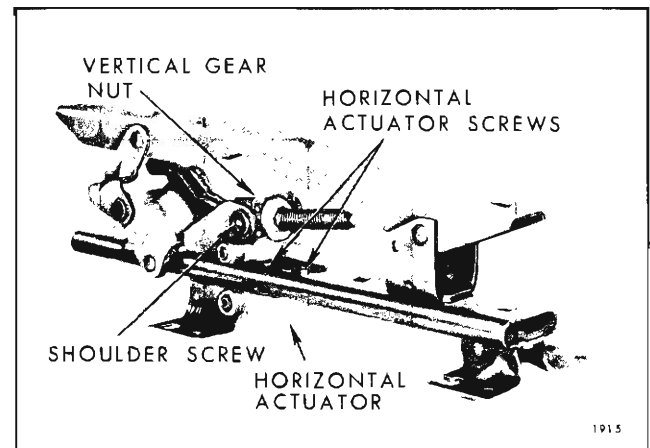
H7—Front Seat Adjuster Four-Way Tilt
